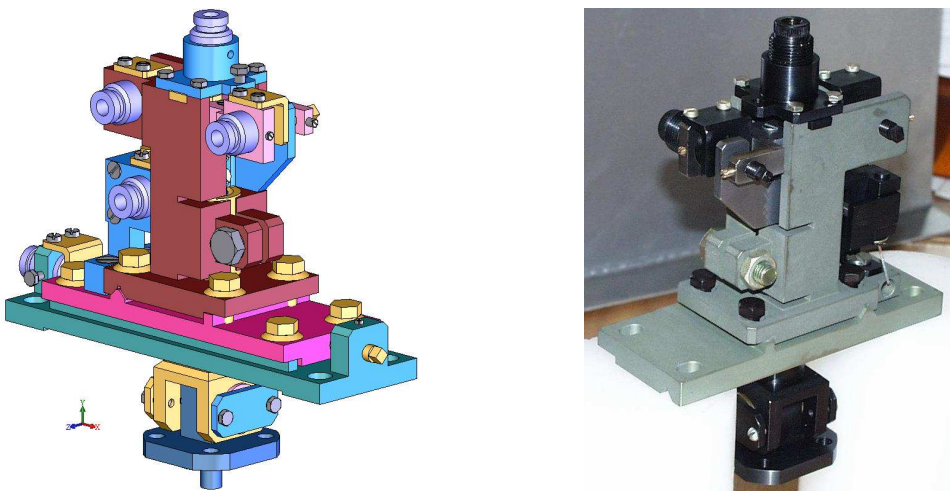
Adjustment unit for the alignment of the drift tubes (left: drawing, right: photo)
